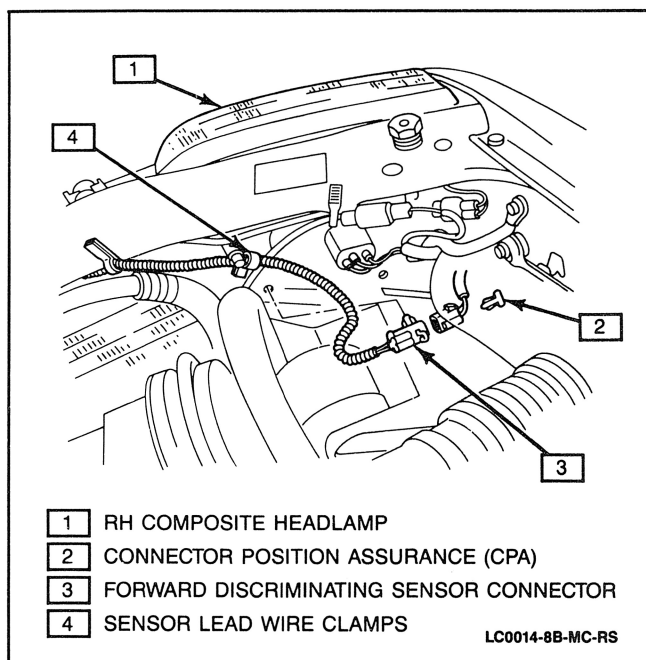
Forward Discriminating Sensor Connector brackets and wiring harness should never be modified in the field.
